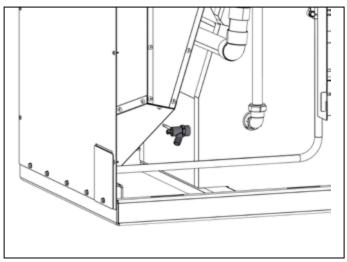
Location of drain cock (left hand side panel removed for clarity)
